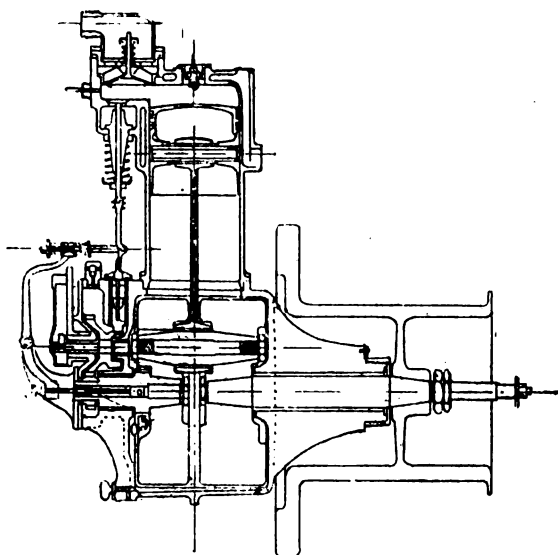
SECTION OF GAILLARDÉT 6 H.P. MOTOR.
